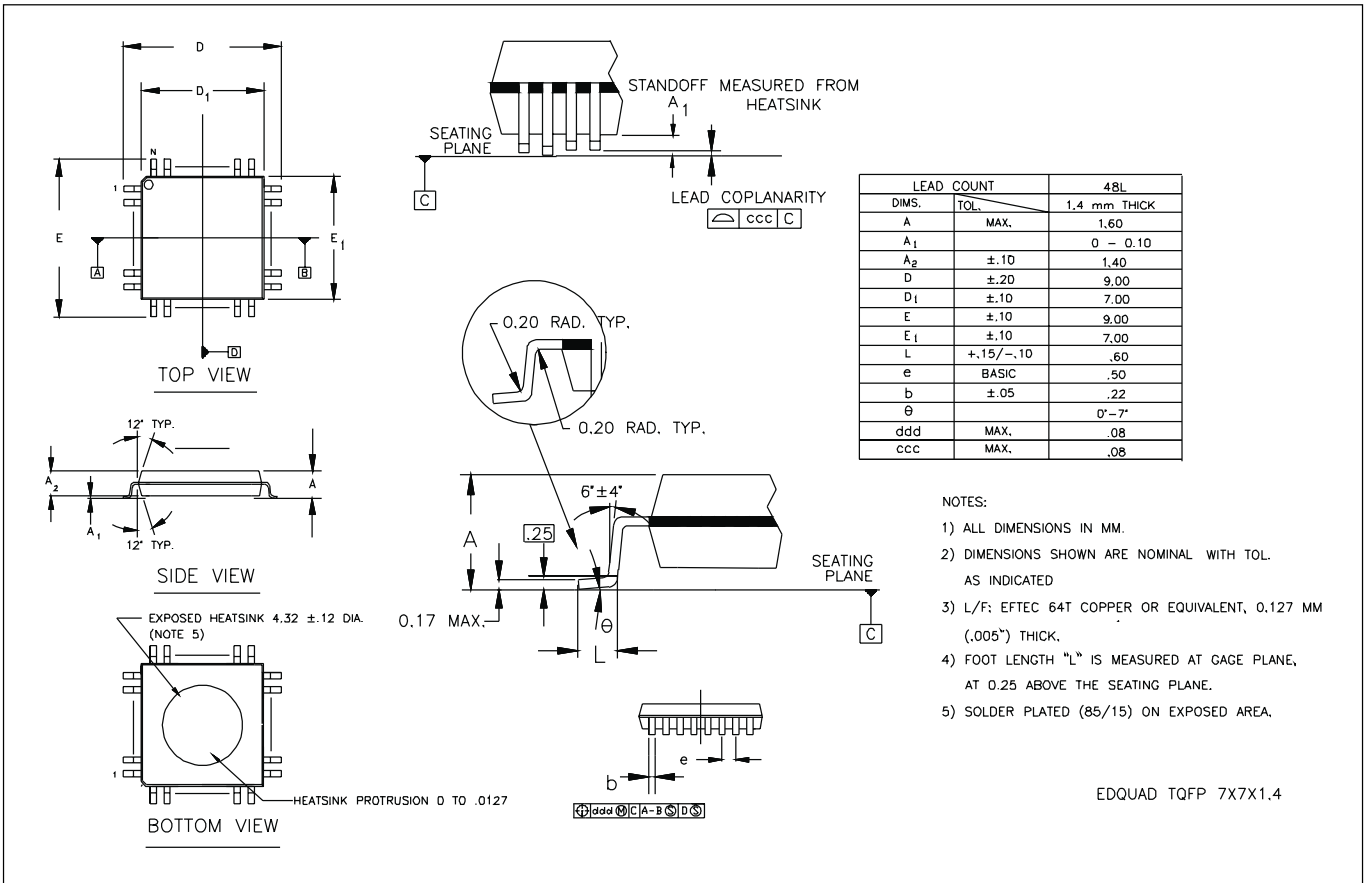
Package 48 pin, TQFP. All dimensions are in mm.
